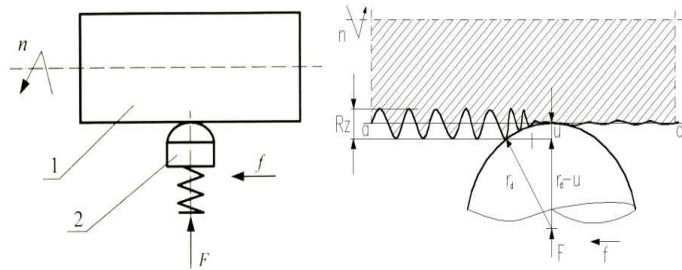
The scheme of slide diamond burnishing: 1 – workpiece; 2 – burnishing tool;  $F$  – burnishing force;  $f$  – feed;  $n$  – workpiece rotation;  $r_d$  – radius of tool tip [17].
